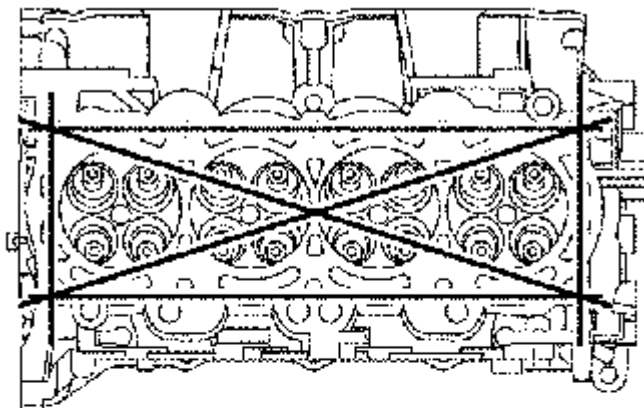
Inspecting Cylinder Head For Flatness
